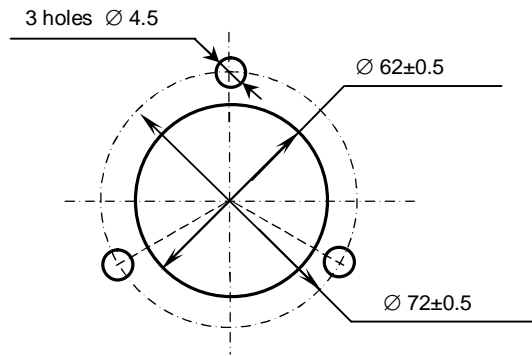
The LGF-12-003B-100 Hand Wheel Mounting Dimensions
